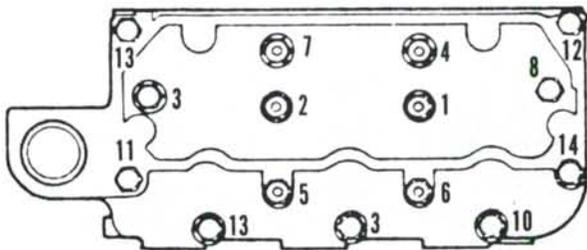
Tightening sequence for cylinder head bolts on three-cylinder engines. Tighten bolts in four steps as outlined in text.
